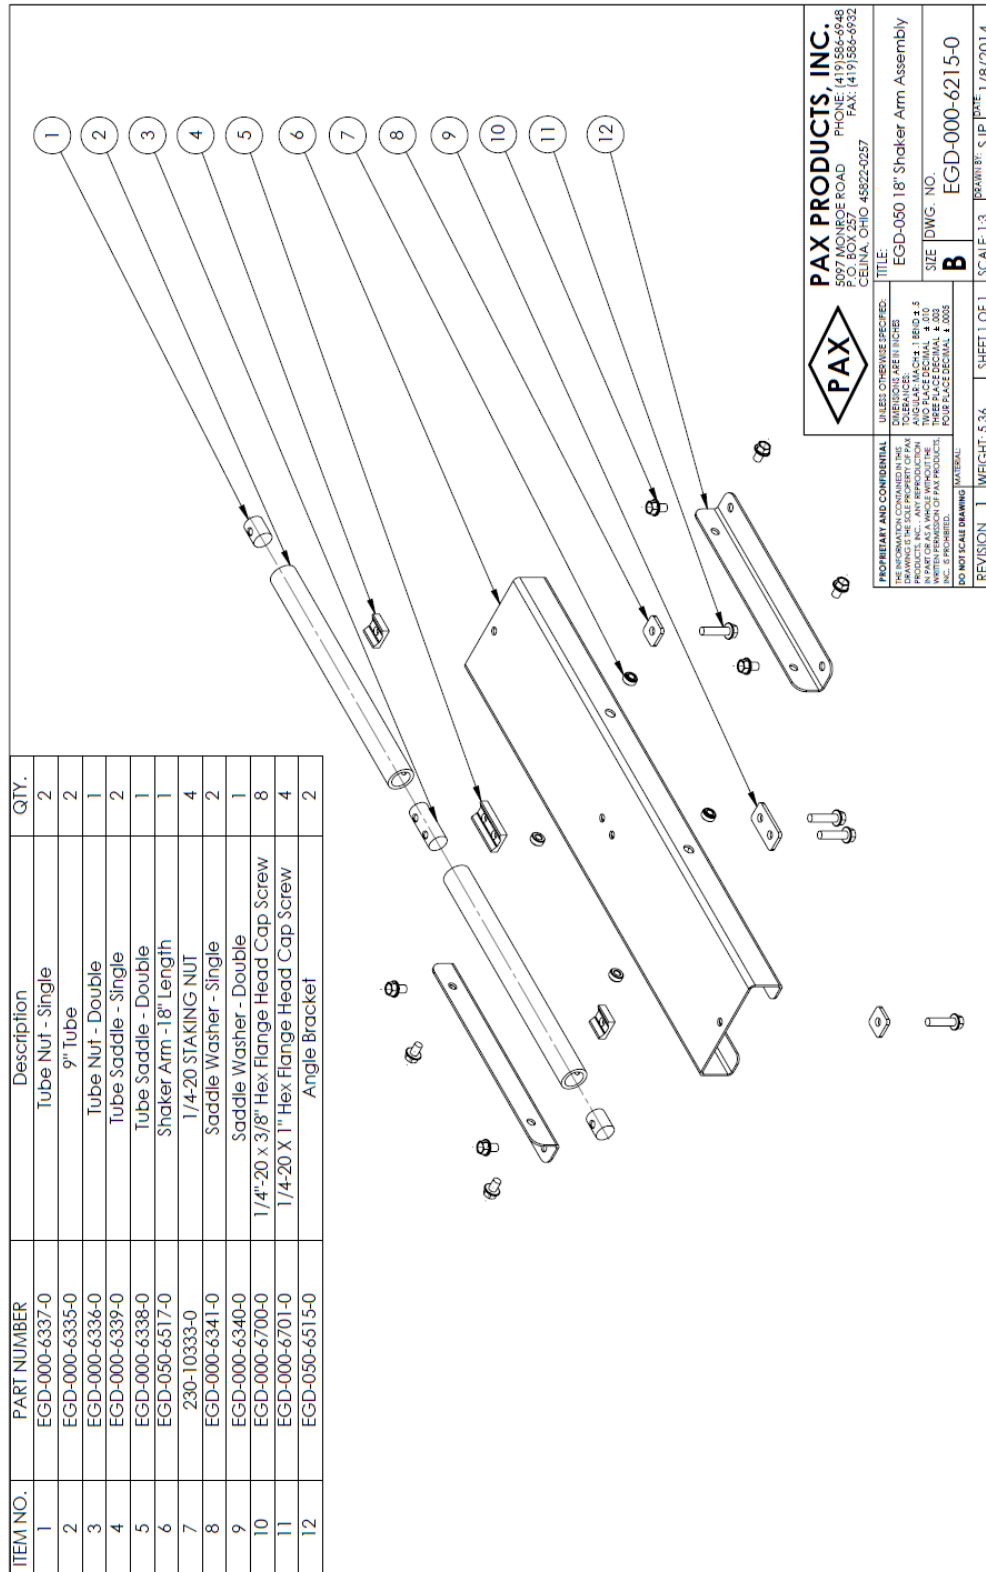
EGD-000-6215-0 EGD-050 18" SHAKER ARM ASSEMBLY
